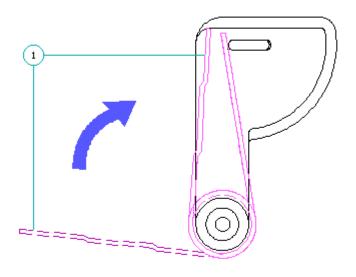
Compressing the Spring on the Guide (Eject Switch Side)
